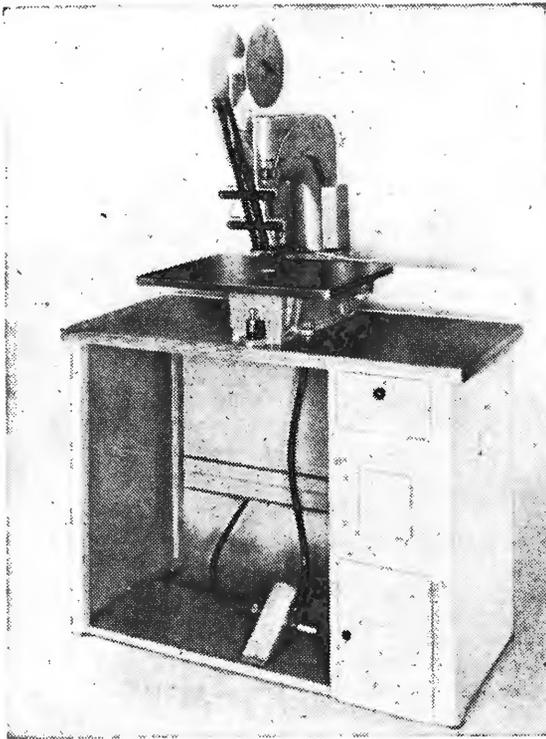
Machine modified for bench operation showing the operator's foot control and with the safety cover guards in position on the machine.
